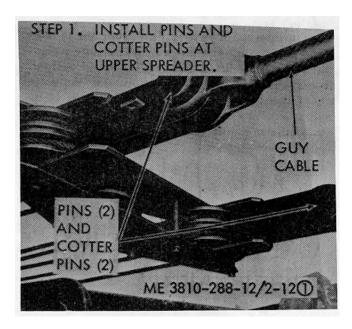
Guy cables, removal and installation (sheet 1 of 2).
